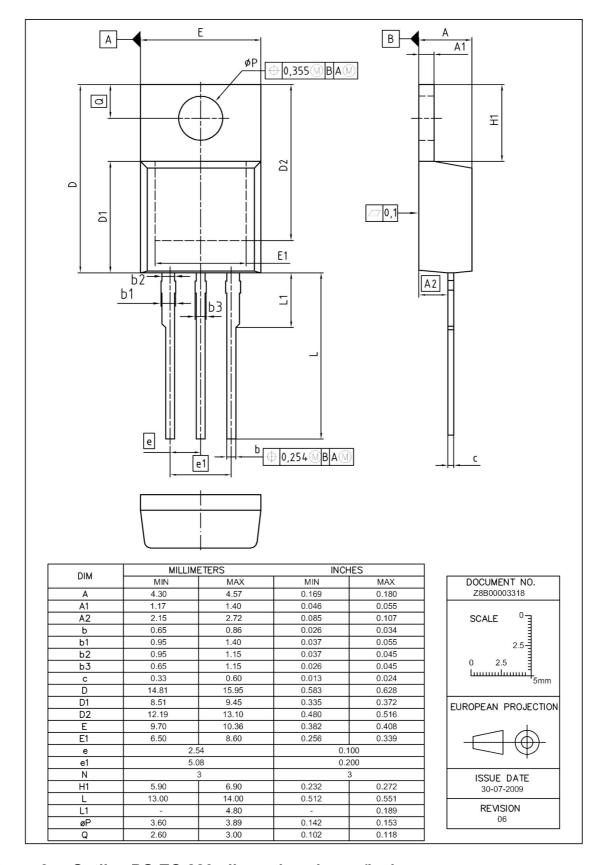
Outline PG-TO 220, dimensions in mm/inches
